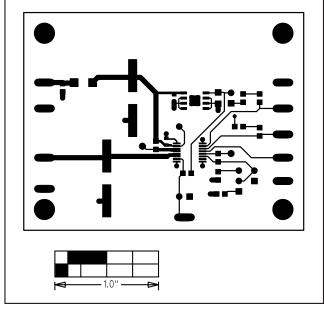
MAX16913A EV Kit PCB Layout—Component Side
